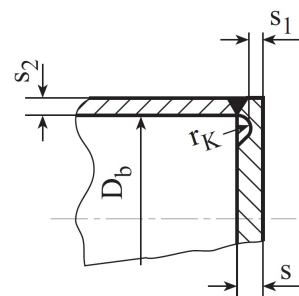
Welded-neck endplates with relieving groove
